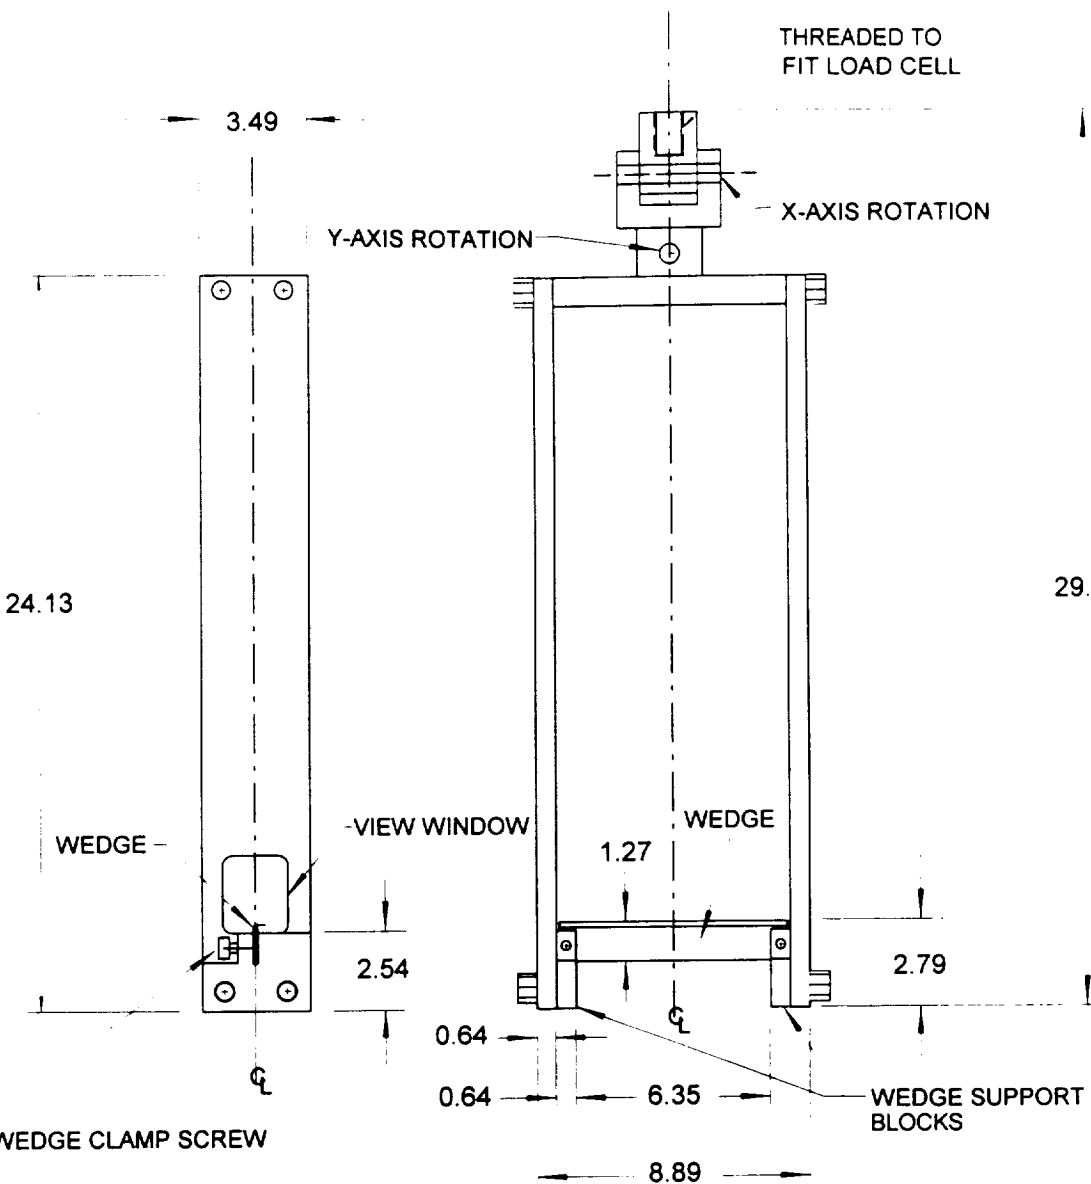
Wedge peel test fixture. Part of frame is removed in left view for clarity. Dimensions are in centimeters.
